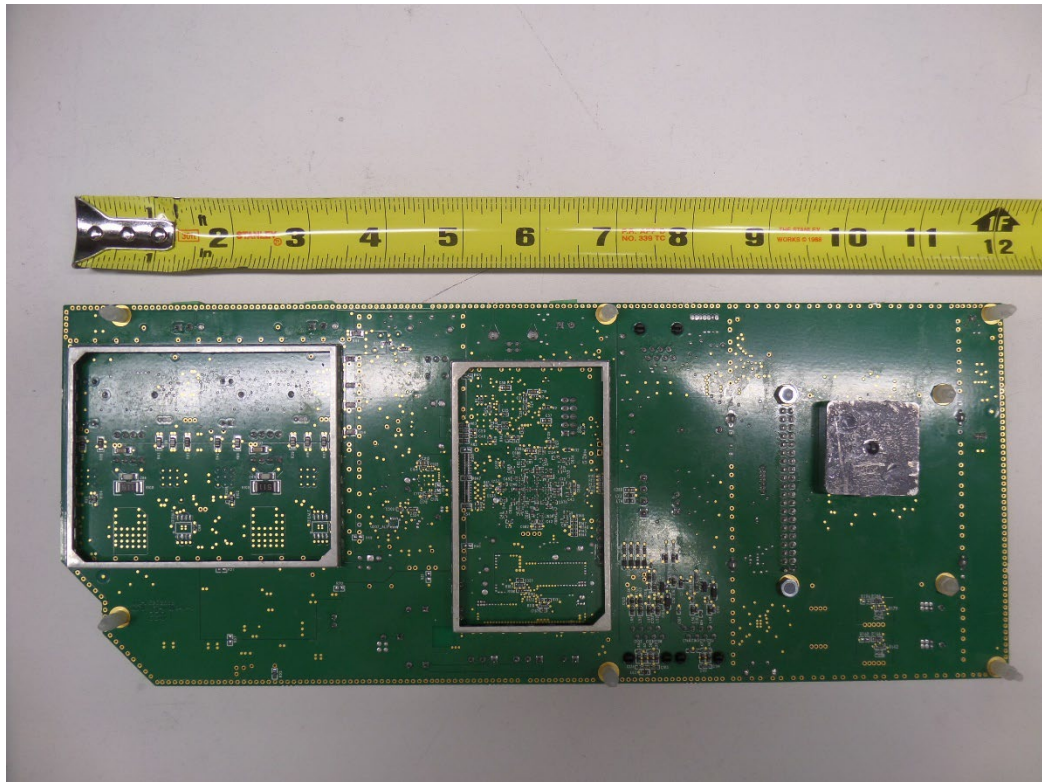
NP22 PRI/PAB LOWER BASE EAS RF BOARD BOTTOM SIDE WITHOUT SHIELDS
